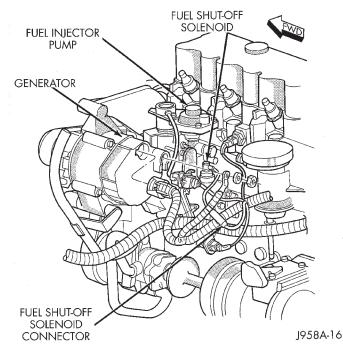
Fuel Shut Off Solenoid Connector- Diesel Engine
